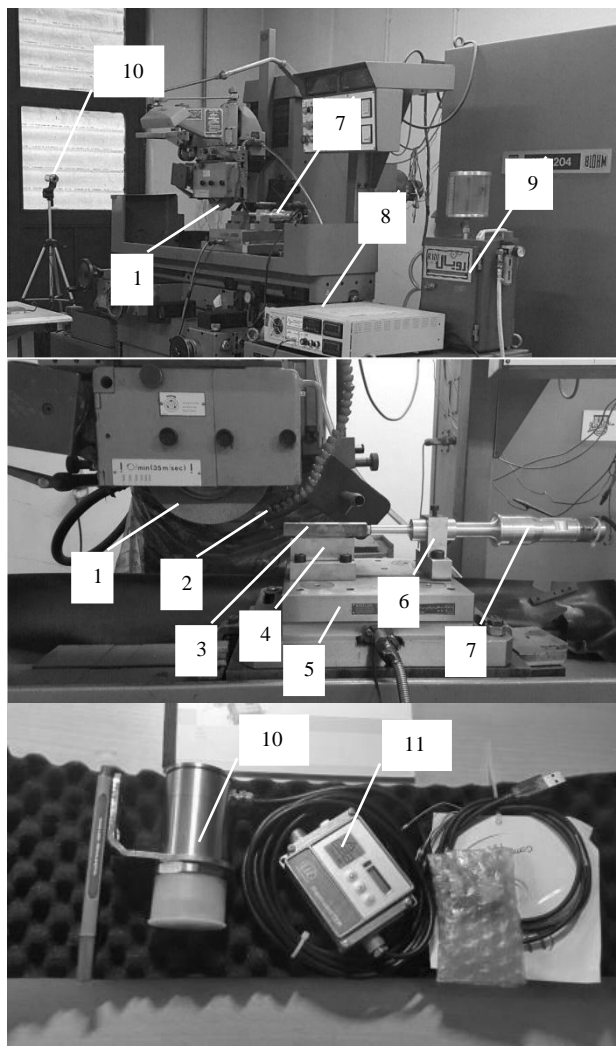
Experimental Setup: 1) Grinding Wheel, 2) MQL Nozzle, 3) Workpiece, 4) Workpiece fixtures 5) Dynamometer, 6) Transducer fixtures, 7) Transducer, 8) Ultrasonic pulse generator, 9) MQL System 10) Infrared camera, 11) Infrared camera controller
